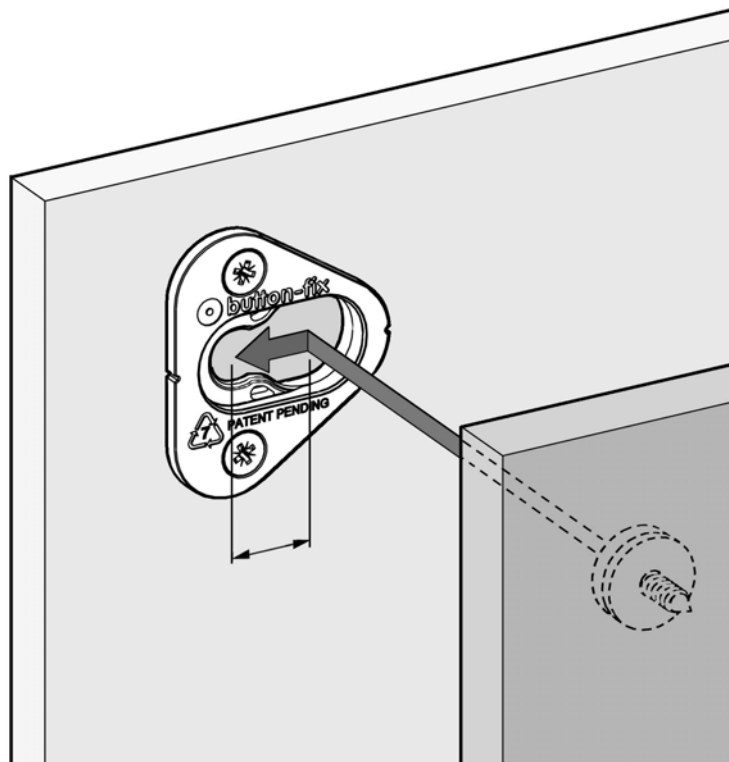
Buttonfix™ - Recessed Mounting with Horizontal Slot
